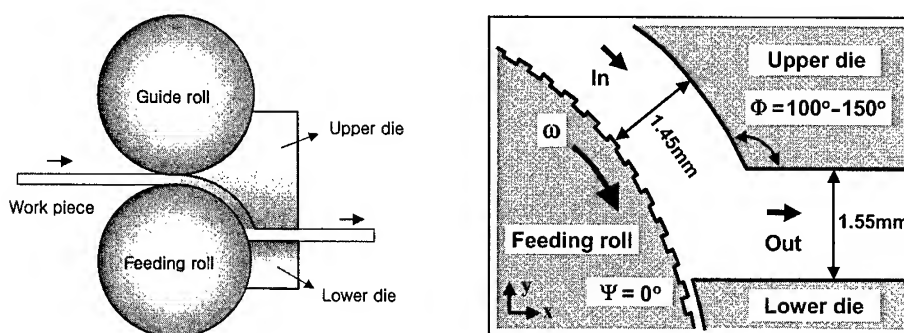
A schematic showing the concept of the C2S2 machine used for continuous confined strip shearing based on ECAP
